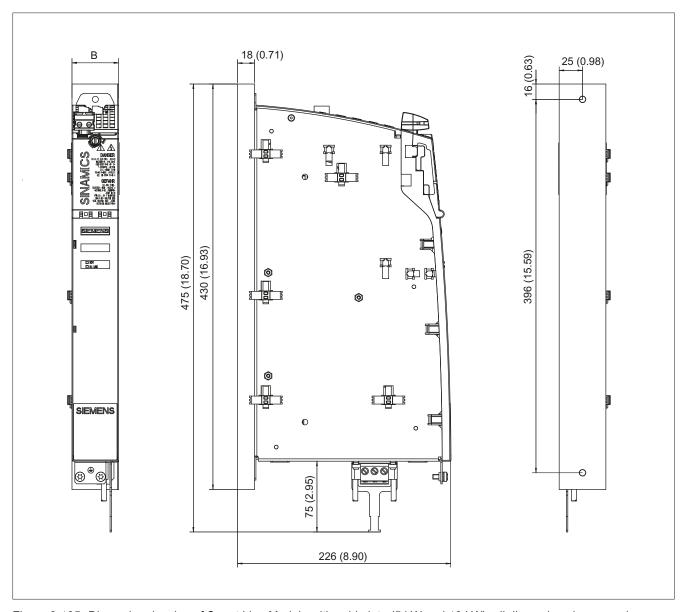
Dimension drawing of Smart Line Module with cold plate (5 kW and 10 kW), all dimensions in mm and (inches)
